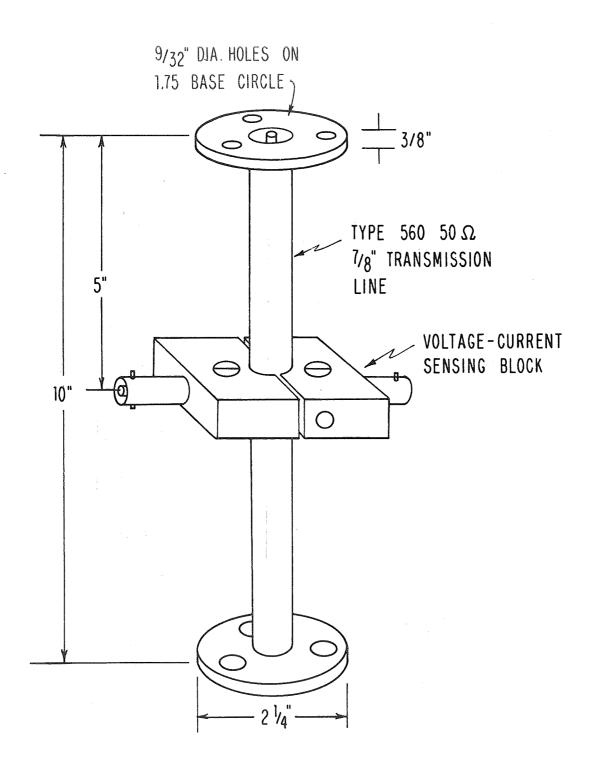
ADMITTANCE MEASUREMENT ASSEMBLY (DETAILS)
